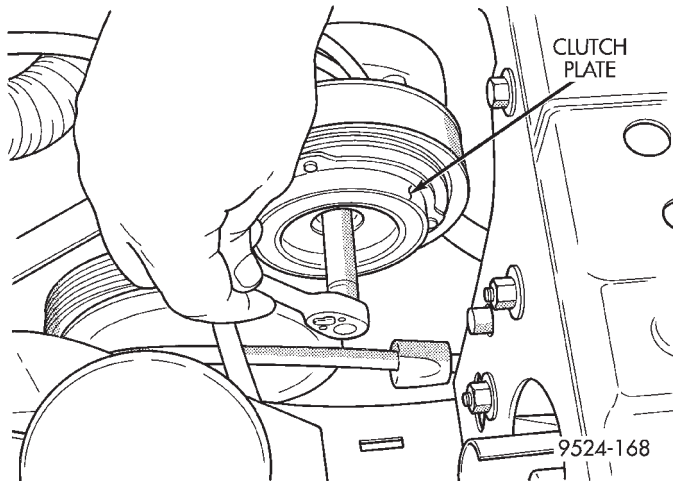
Compressor Shaft Bolt and Clutch Plate
